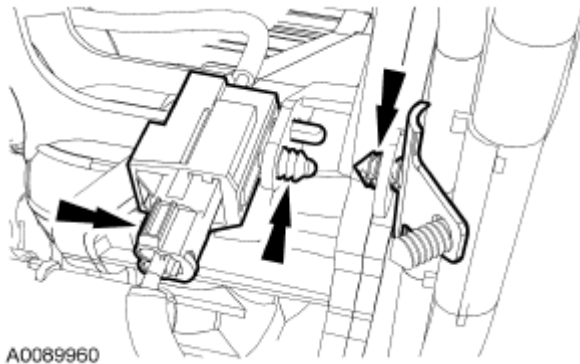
Locating Wiring Harness Retainers (1 Of 2)
